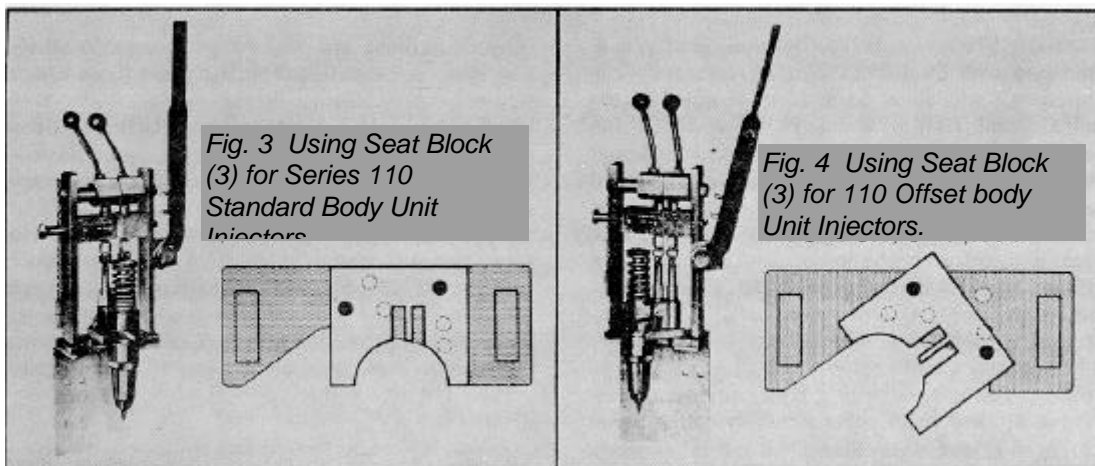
Using Seat Block (3) for Series 110 Standard Body Unit Injectors
